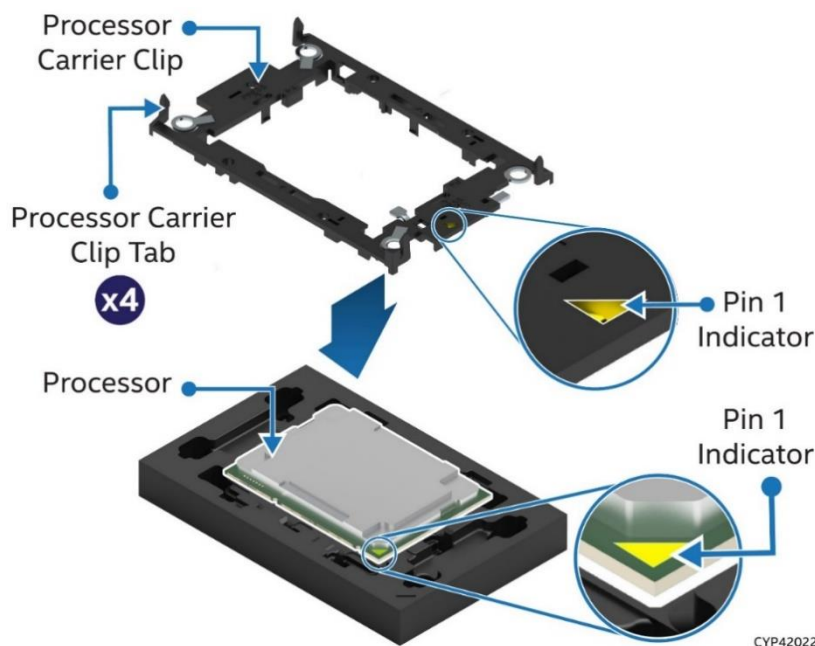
Installing Processor Carrier clip onto Processor – Part 1
